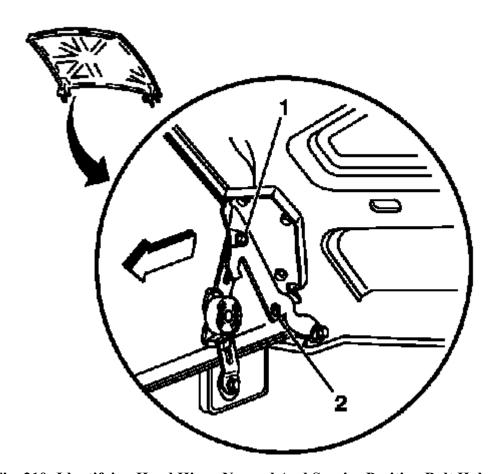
Identifying Hood Hinge Normal And Service Position Bolt Holes Courtesy of GENERAL MOTORS CORP.
